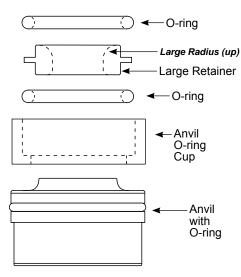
Insert O-ring into Anvil O-ring Cup, then insert Large Retainer (with large radius up), then insert other O-ring.
